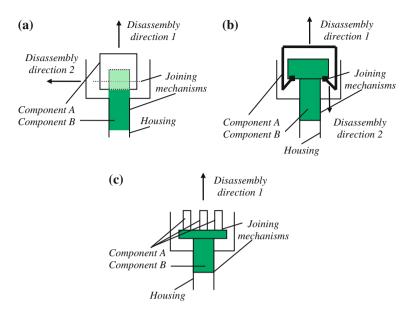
Examples of constraints during disassembly  $\mathbf{a}$  A geometrical constraint.  $\mathbf{b}$  A geometrical constraint.  $\mathbf{c}$  Technical constraint
